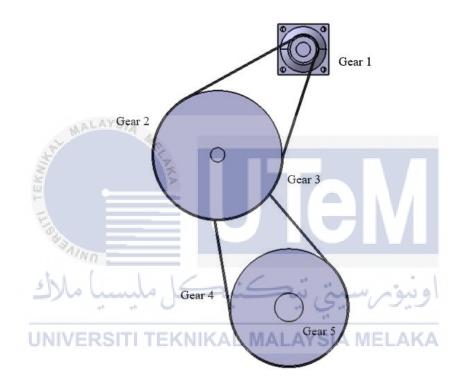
Gear Mechanisms Existing 40 Tons Winch
